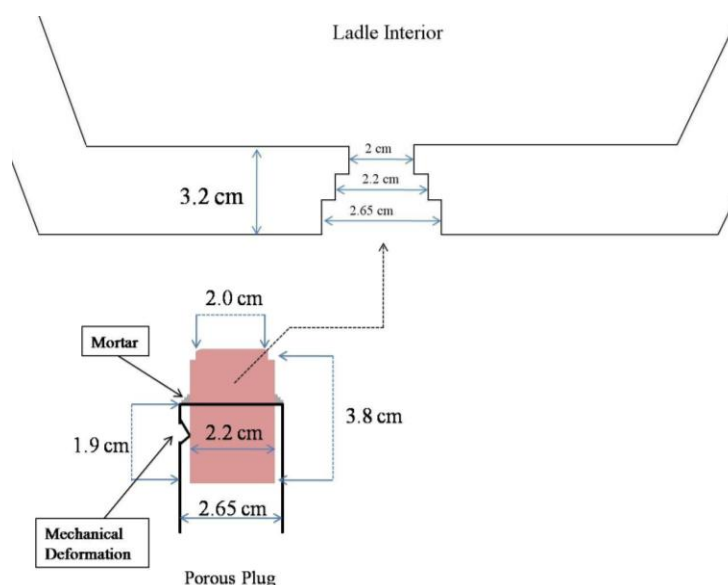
Schematic of Kaltek Liner Showing Porous Plug and Plug Interface Dimensions
